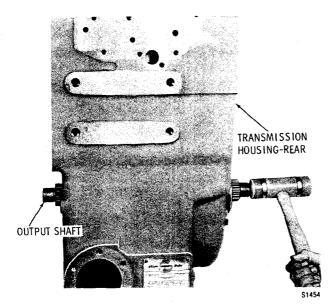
Loosening output shaft front bearing (-1 models with one-piece output shaft)
